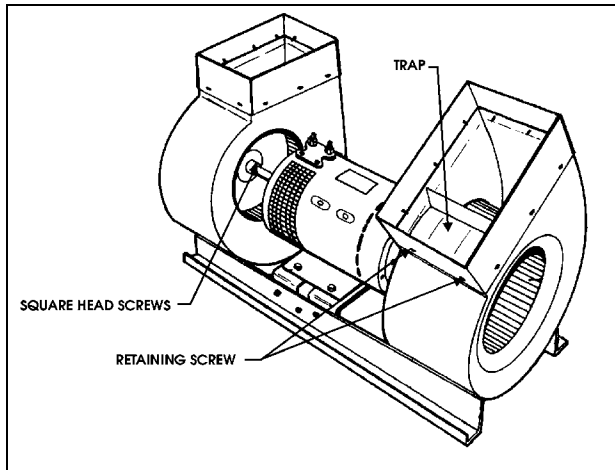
EVAPORATOR MOTOR ASSEMBLY 22036
